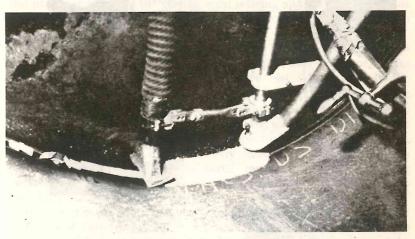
Automatic welding of circumferential seam by submerged arc process Note the vacuum foot for removing excess flux granules on the left and the weld head and flux dispenser on the right
